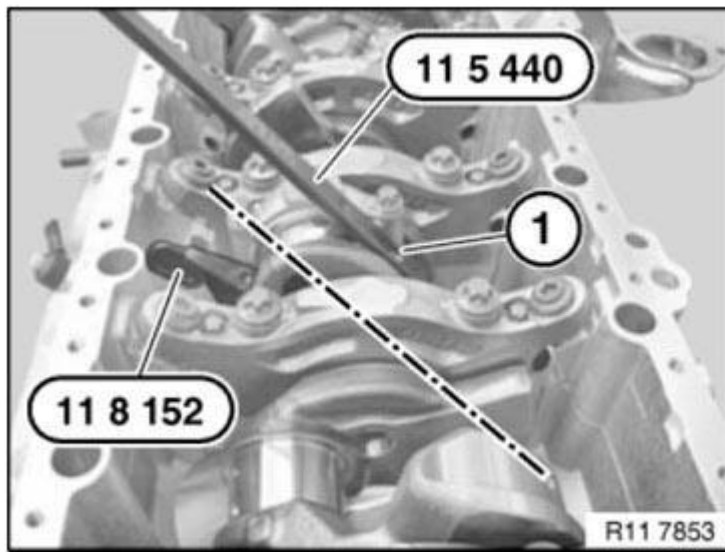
Attaching Crankshaft Journal To Connecting Rod
